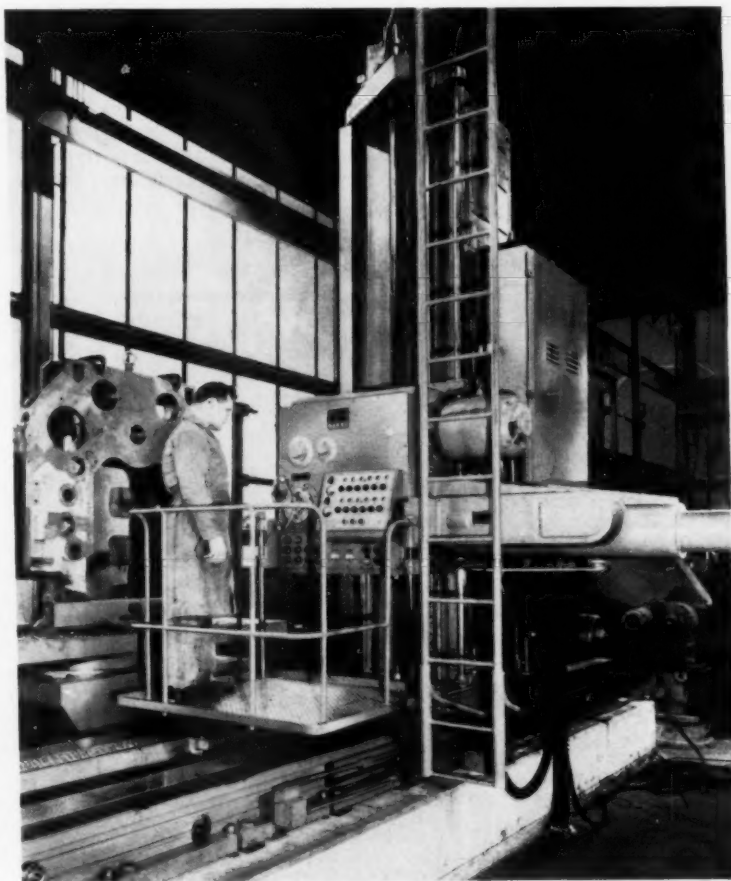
Kaukauna floor type horizontal boring, drilling, and milling machine equipped with full tape control
